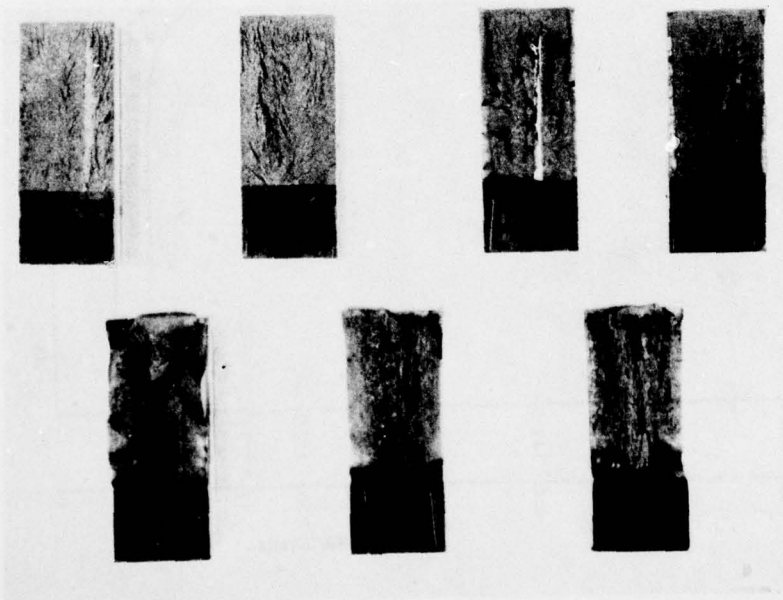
Fracture surfaces of typical sound weld specimens tested at the temperatures indicated (°C). (All fractures are through the weld metal.)
